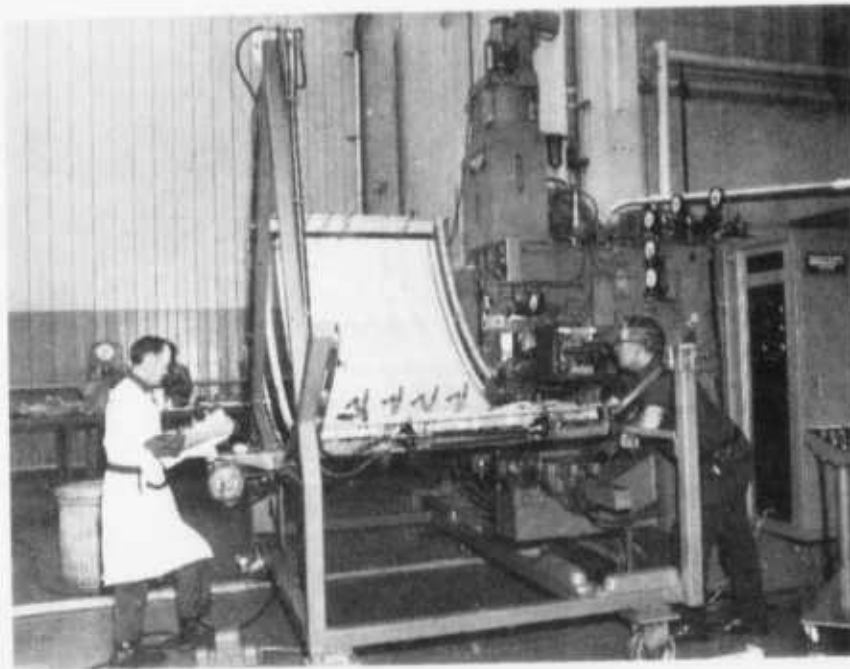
VIEW OF THE 3-AXIS SEMI-AUTOMATIC WELD POSITIONER USED TO JOIN THE C-130 FLIGHT AND TEST PANELS
